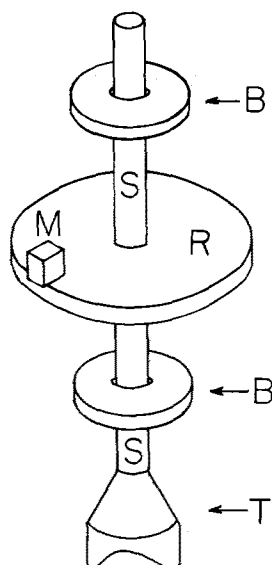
Rotor on a stiff shaft, supported in fixed bearings.
